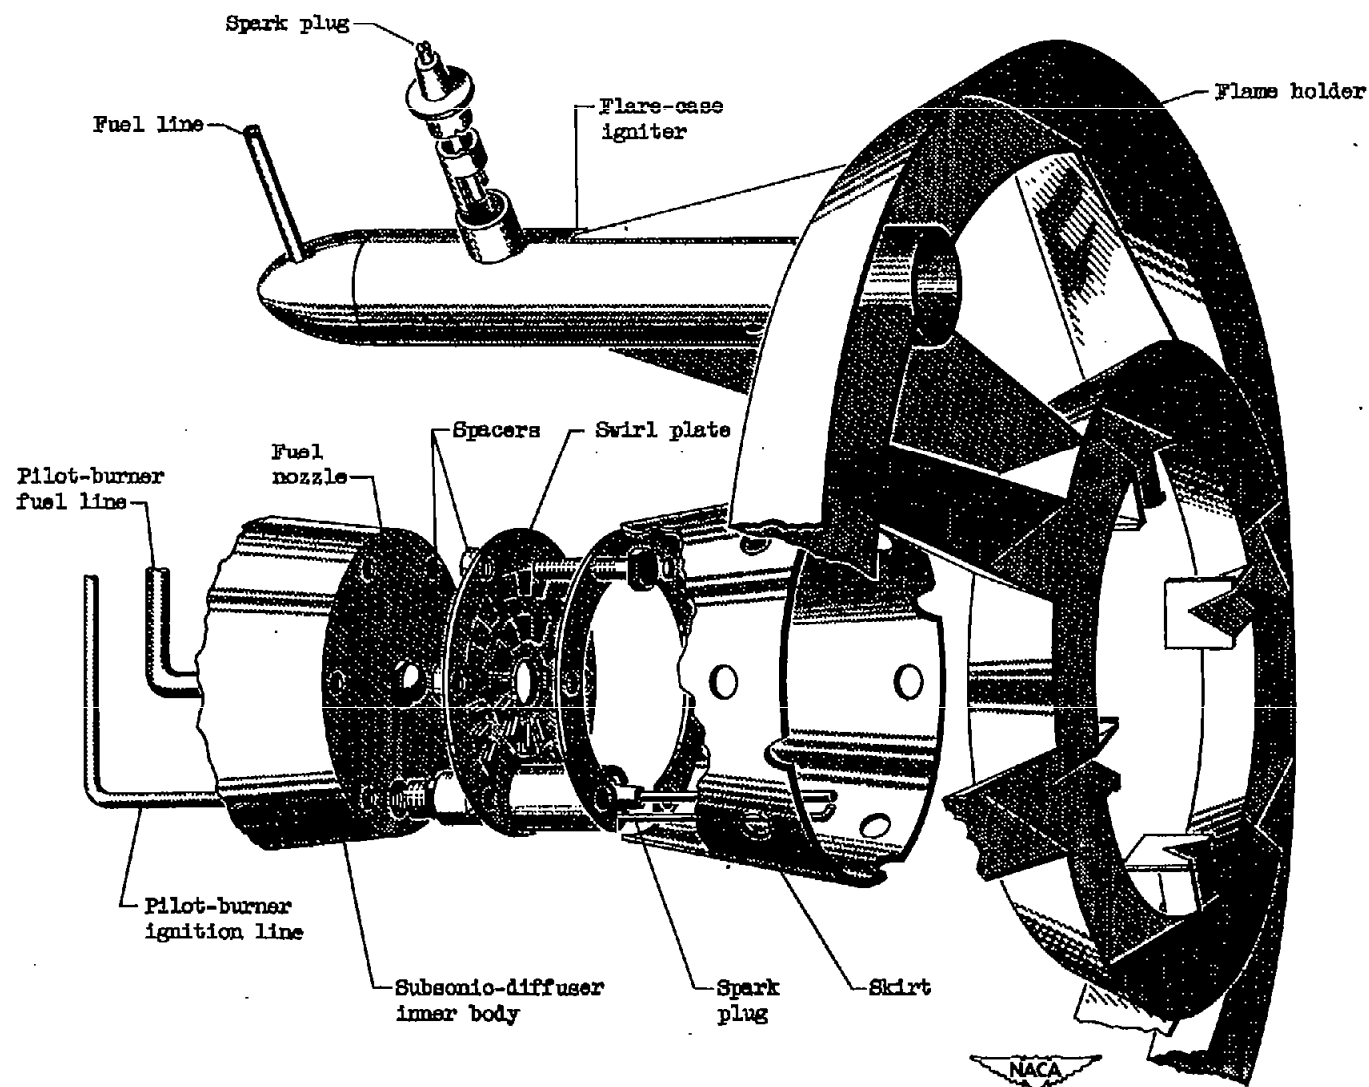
Exploded view of pilot-burner and flame-holder assembly.
